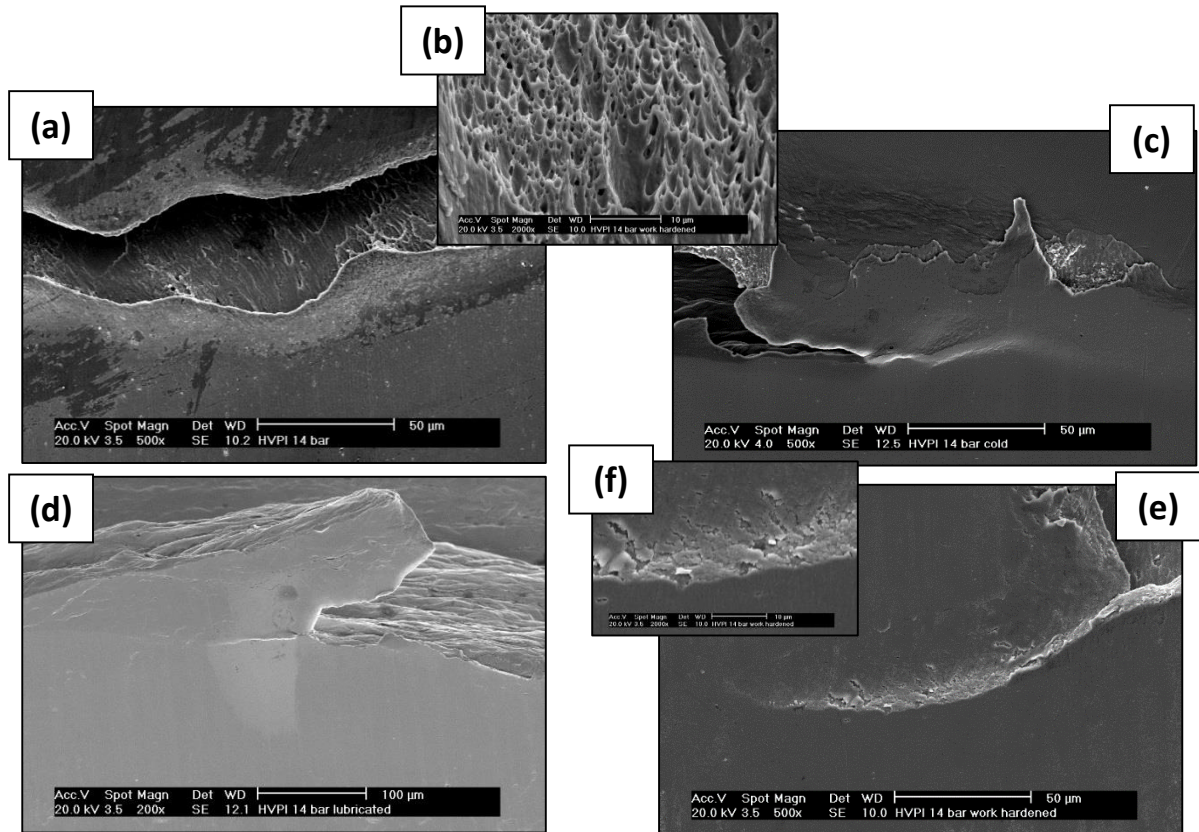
Detail of fracture cracks at different impact conditions. (a) dry impact (b) detail of ductile fracture (c) low temperature impact (d) lubricated impact (e) work hardened impact (f) detail of fracture formed on WH sample
